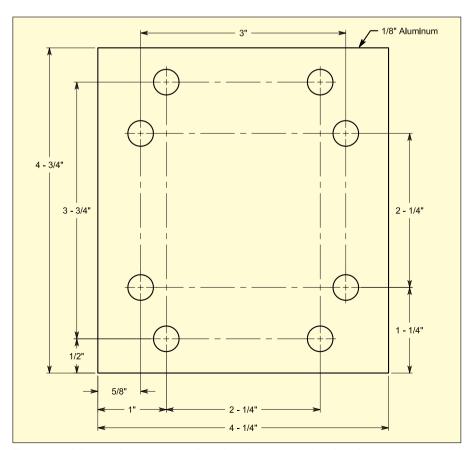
Adapter plate to secure the azimuth rotator to the elevation rotator.
